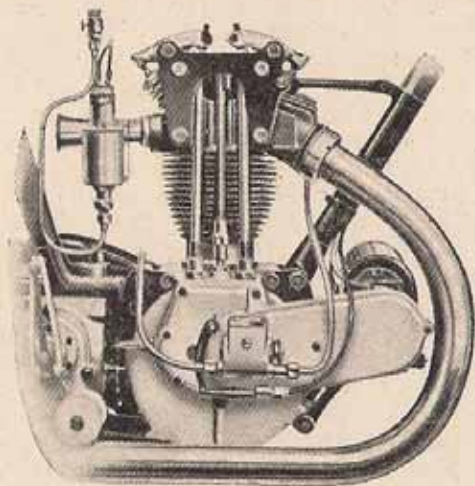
SHOWING THE MECHANICAL PUMP ON A 1927 3-49 H.P. H6 OVERHEAD VALVE A.J.S. ENGINE
